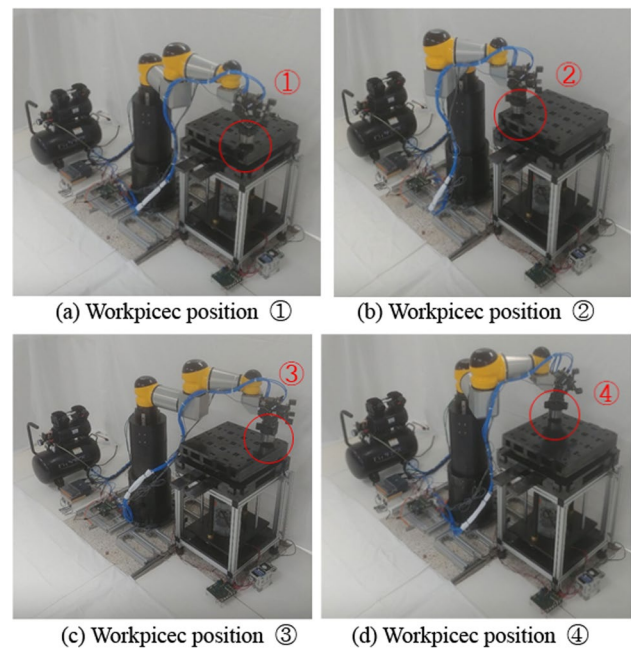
Characteristics test result of 5-axis robot in workpiece loading device before processing
